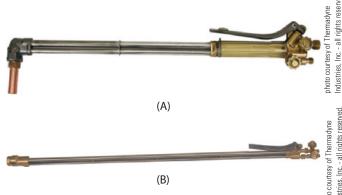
Hand torches for thick sections have longer tubes (A) or have straight cutting tips (B).
